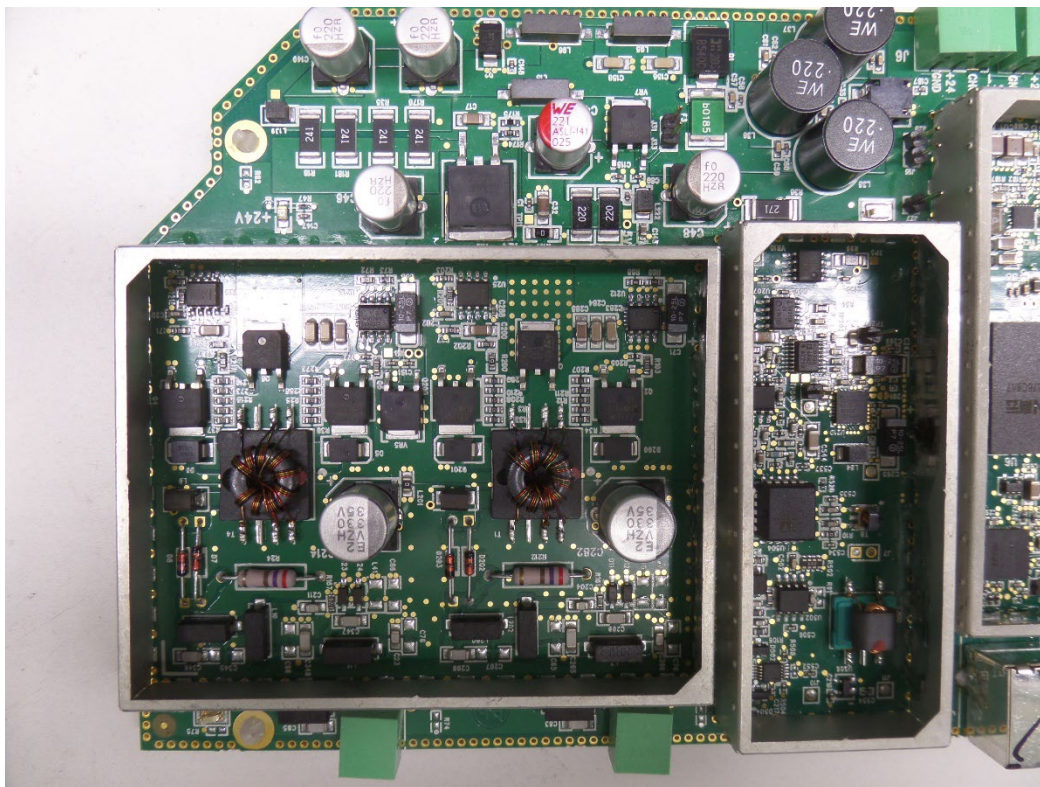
NP12 PRI/PAB LOWER BASE EAS RF BOARD TOP SIDE RF SECTION
